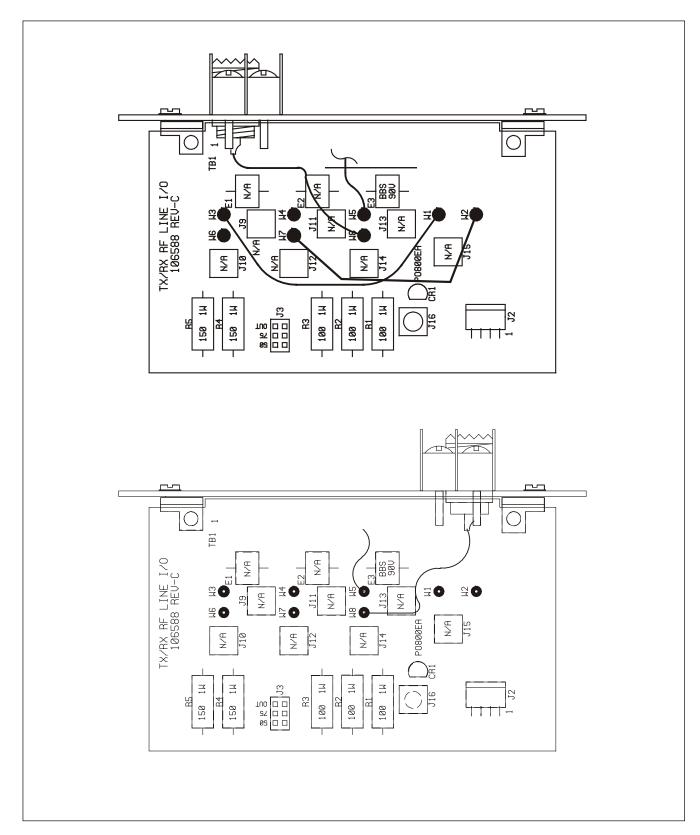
Component locator drawing, RX/RX RF Line I/O module (106605-1 and -2)
